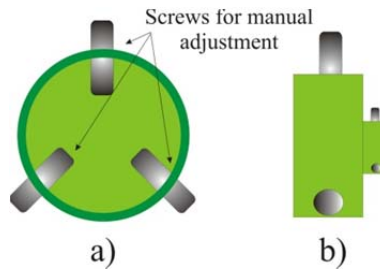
a) Mechanical coupler frontal view, b) Mechanical coupler side view.
